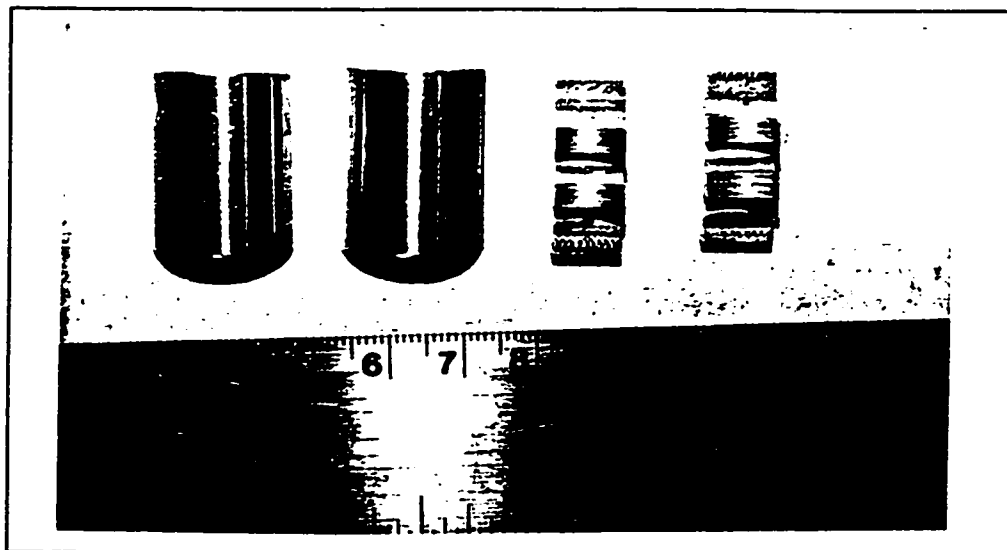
Tube and tubesheet frictional test specimens (Reduced contact area)
